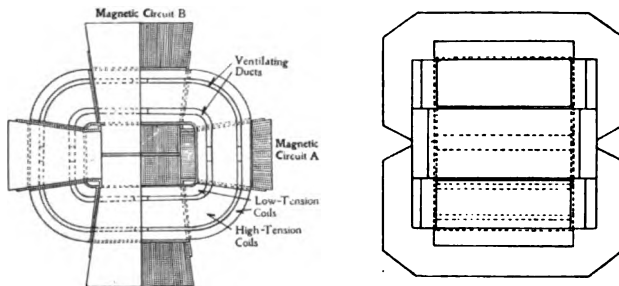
LATEST FORM OF THE SHELL-TYPE TRANSFORMER
